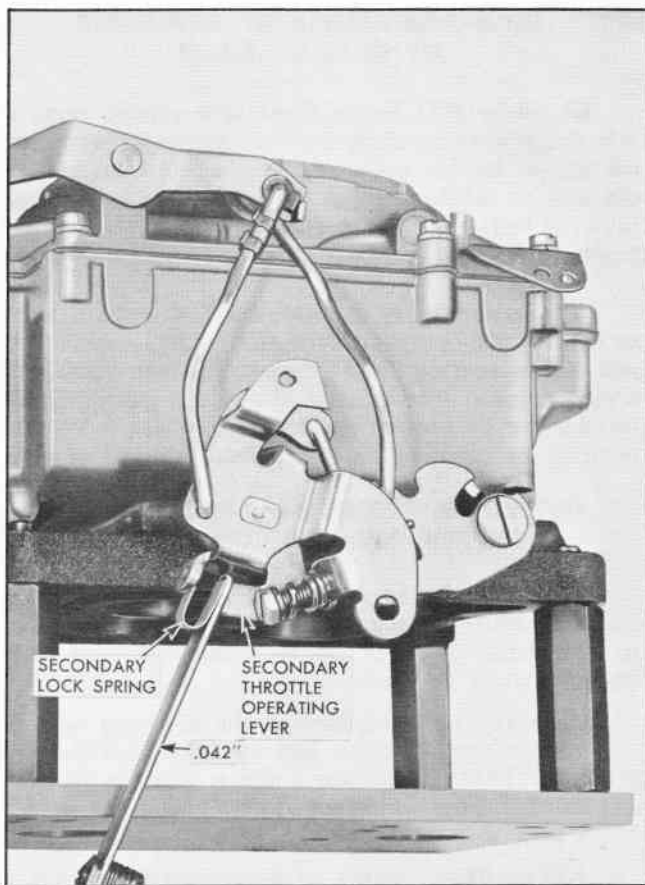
Measuring Clearance Between Secondary Lock Spring and Secondary Throttle Operating Lever
